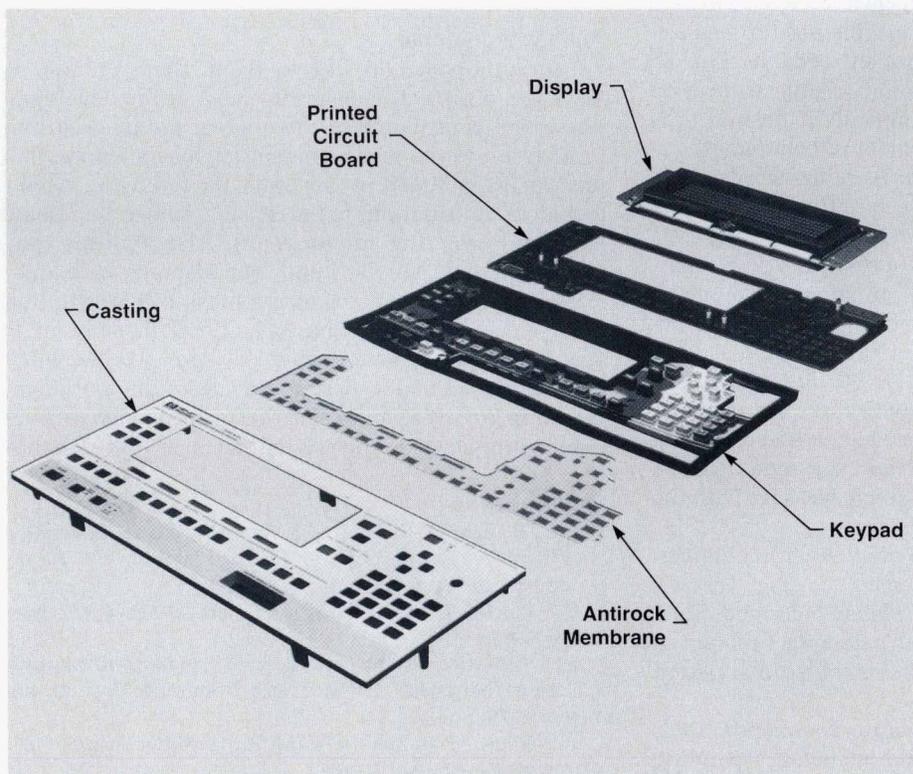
The rubber keypad and the special casting are key components of the HP 8360 front-panel assembly.
